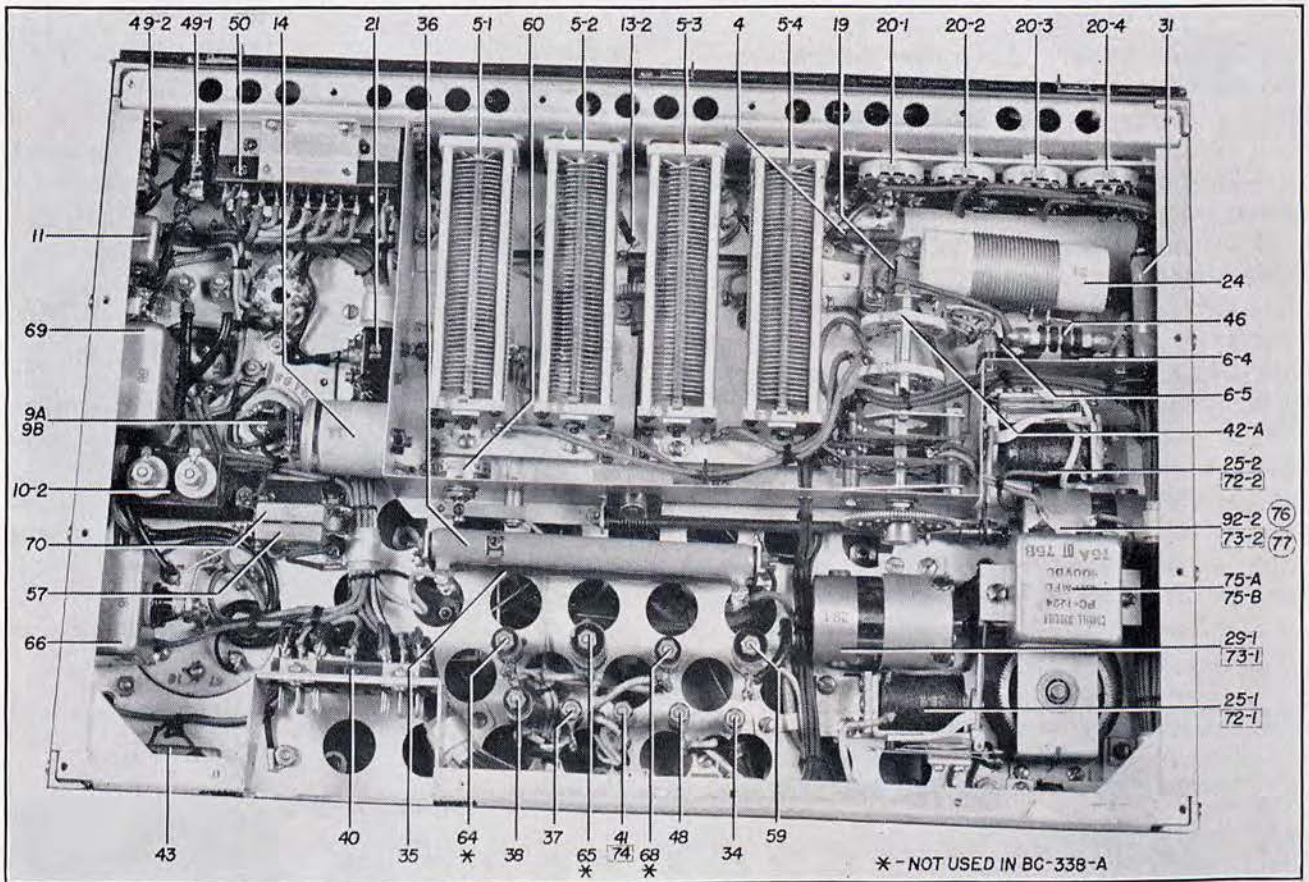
RADIO TRANSMITTER BC-338-A OR BC-353-A, BOTTOM VIEW, SHIELD REMOVED
